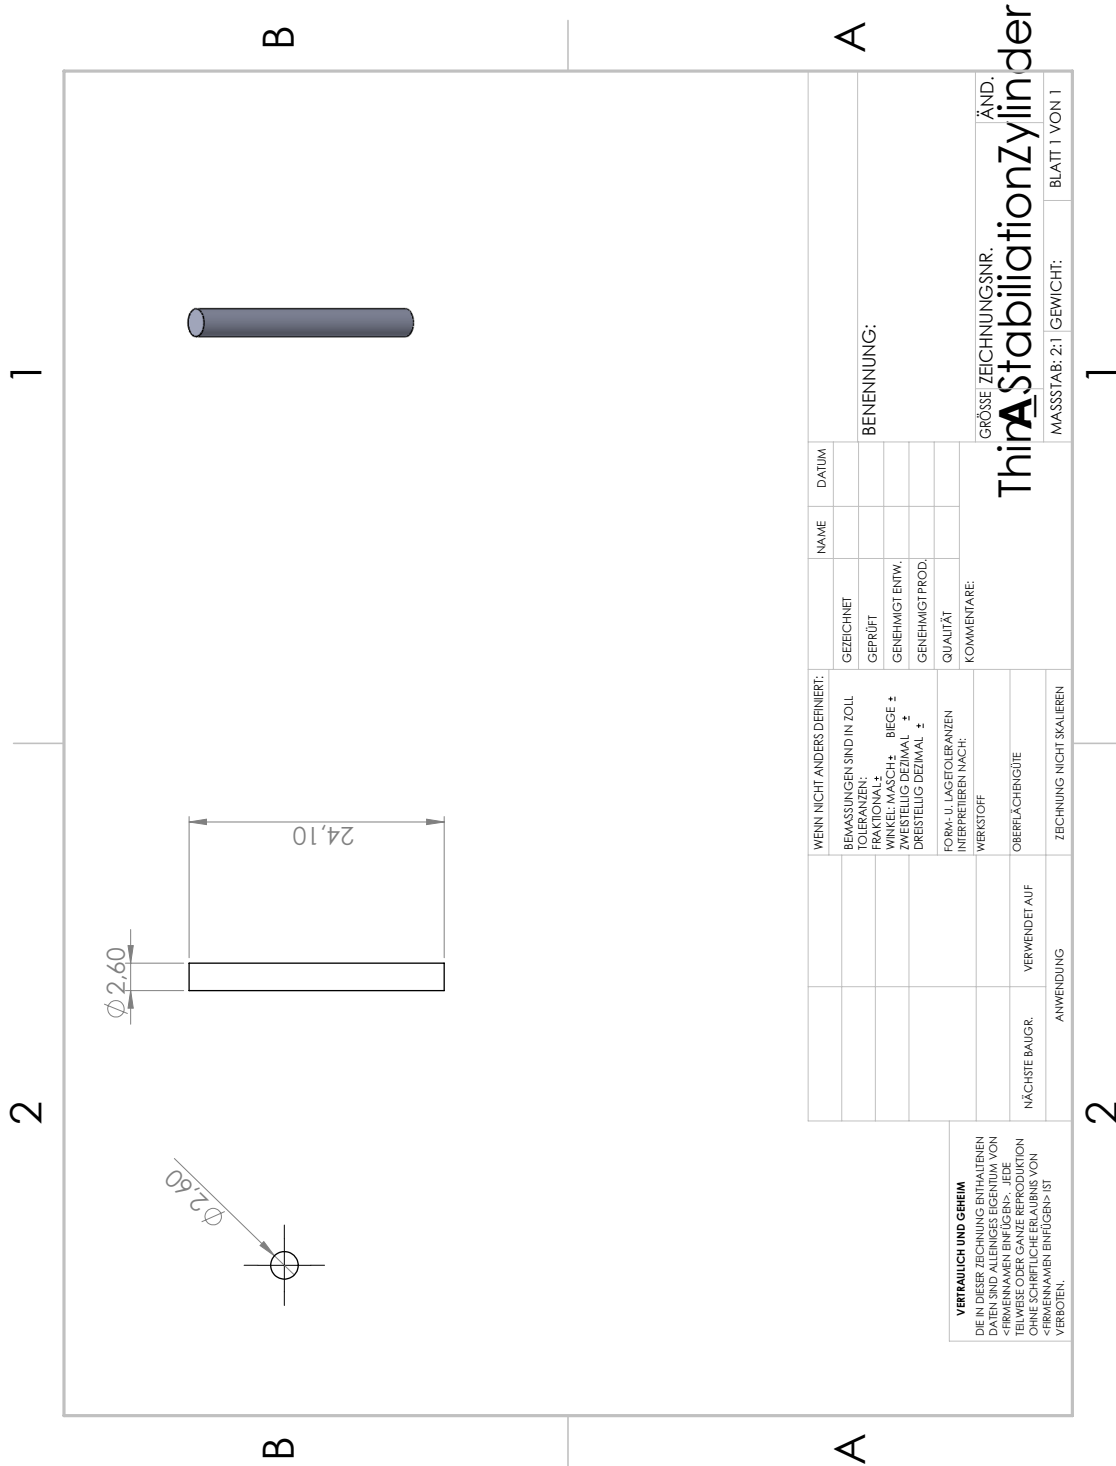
Dimensions of the cylindrical piece to stabilize the piece for the DC connections (c.f. Figure 8.4 and Figure 8.6)
